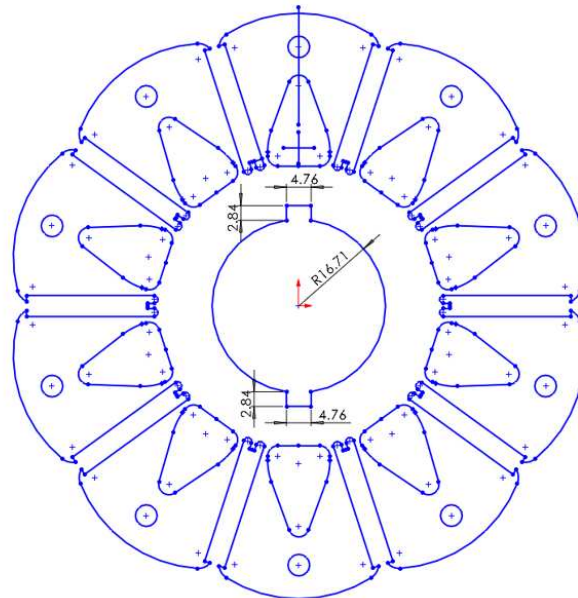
Rotor drawing of the motor being prototyped (all dimensions in mm).
